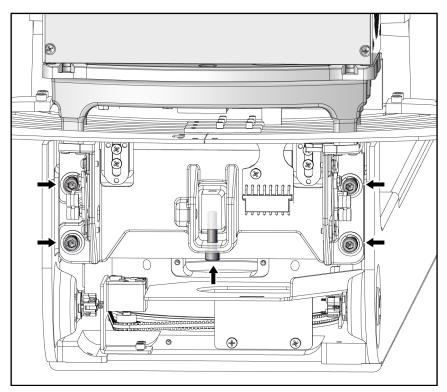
Loosen these screws to lower Detector mounting platform for removal
